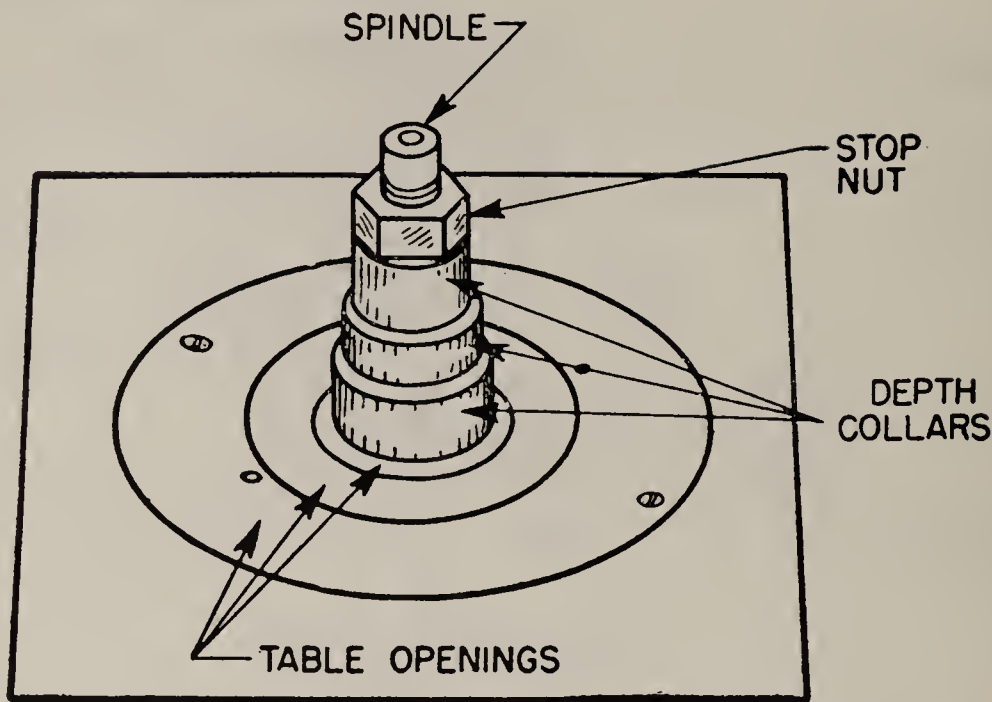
Shaper spindle projecting through the table opening. Note how the table opening may be adjusted by the insertion of proper nesting rings.
